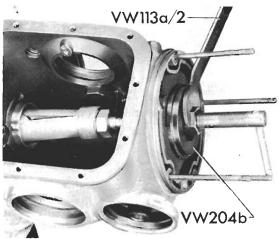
Special wrench being used to unscrew the pinion adjusting ring. Support the drive pinion so that it does not fall suddenly.
